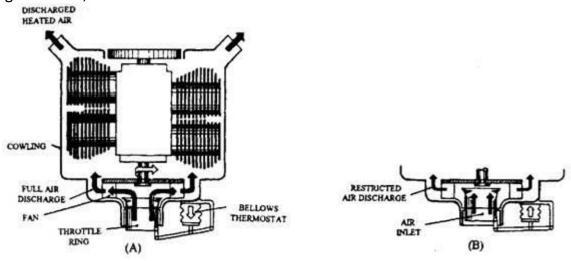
Air-cooled engine with fan discharge control. A. Thermostat opens throttle ring. B. Thermostat closes throttle ring.
